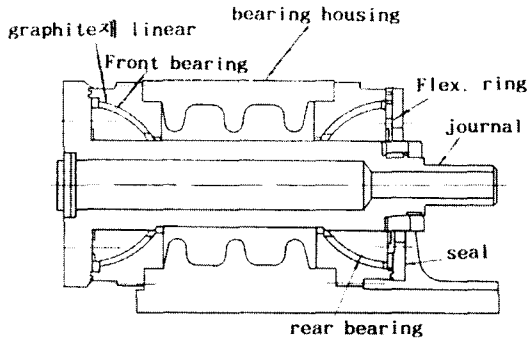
Air bearing for reducing of thermal expansion(Moore Co.)
